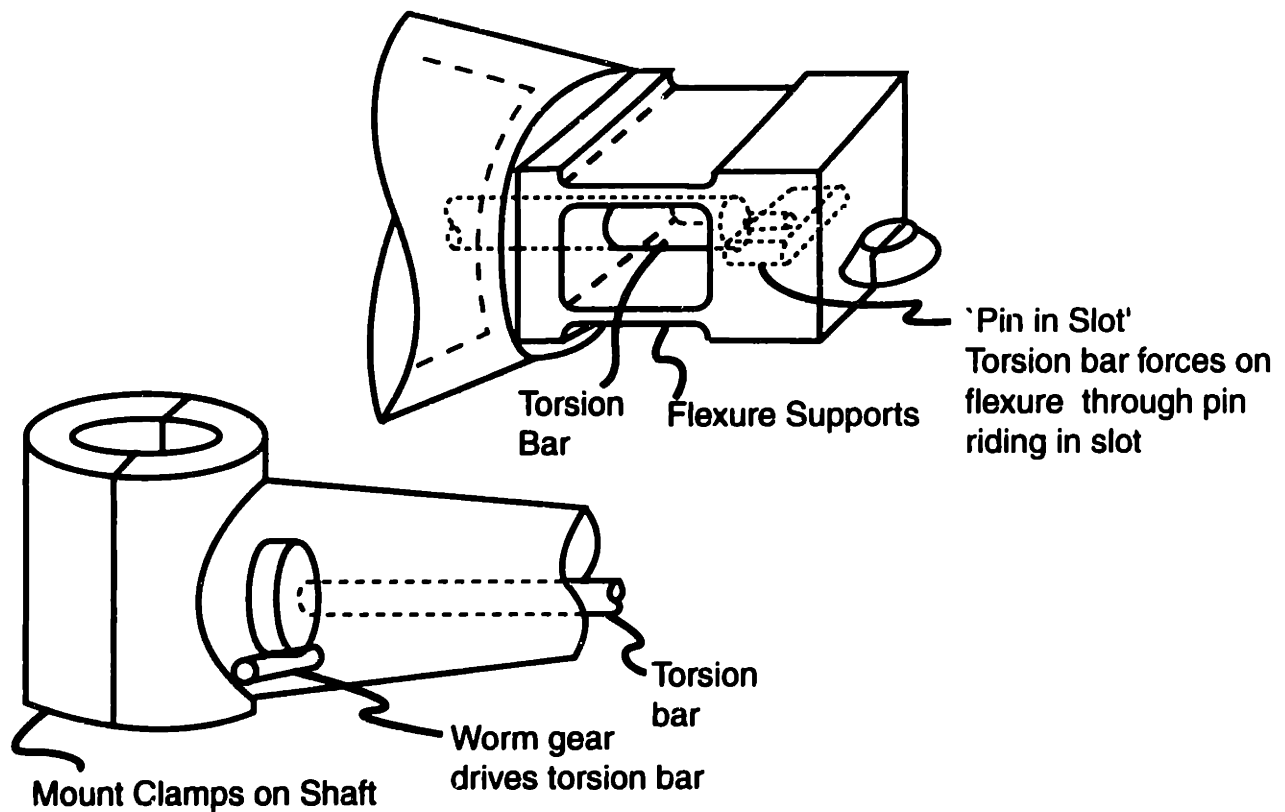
Concept 1 - Flexure at end of arm and torsion bar design.
